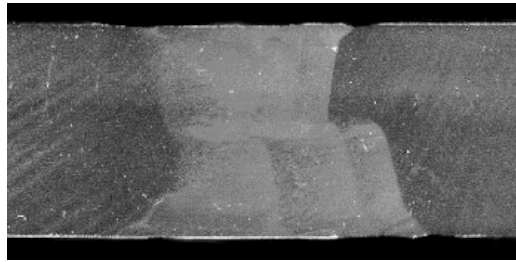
Friction stir processed weldment of Figure 68a
